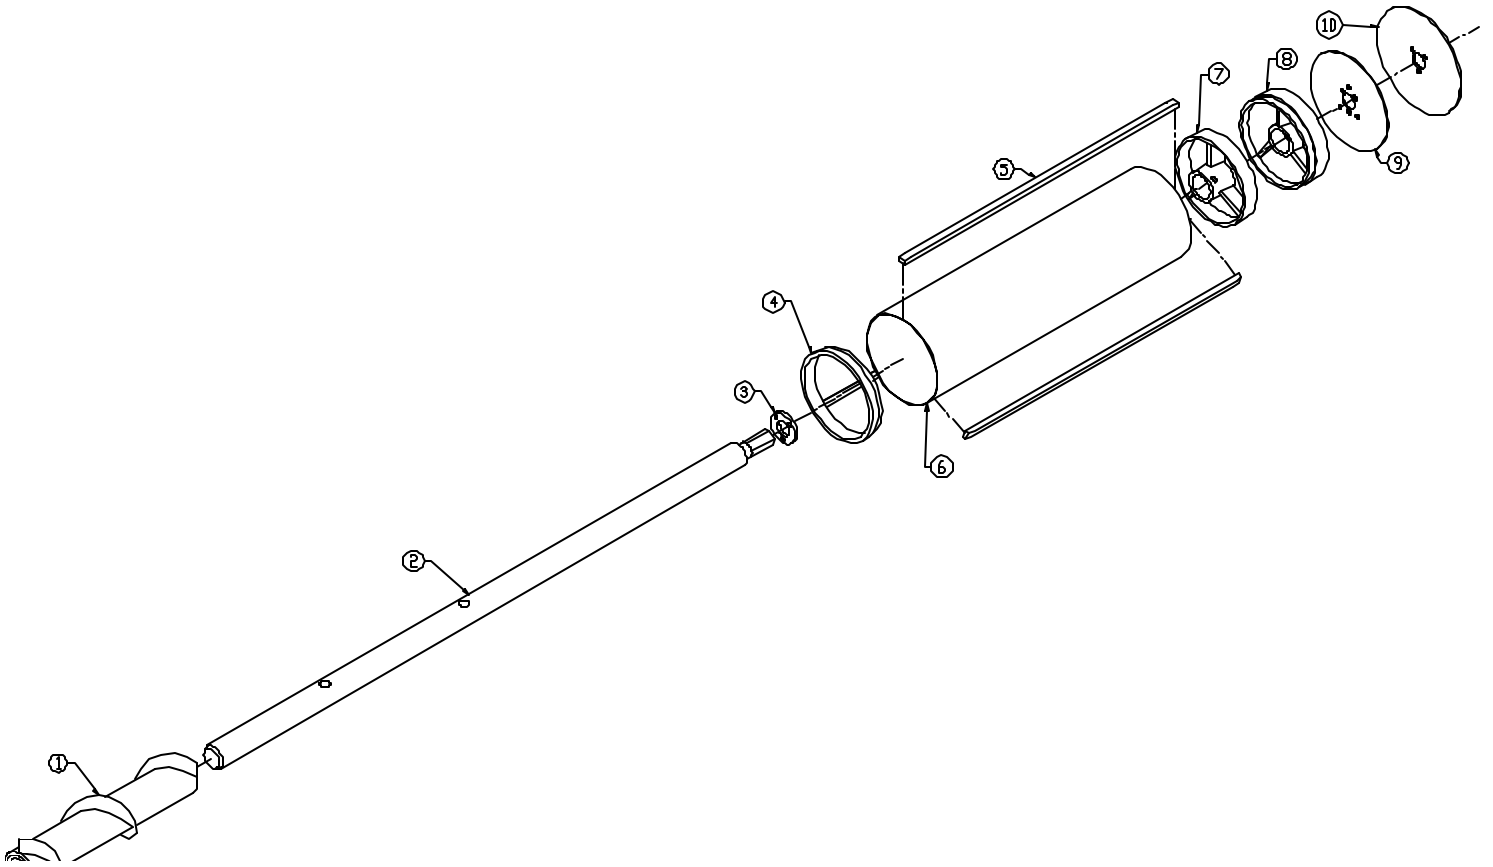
RS 700/1500 Rota-Trap Exploded View
